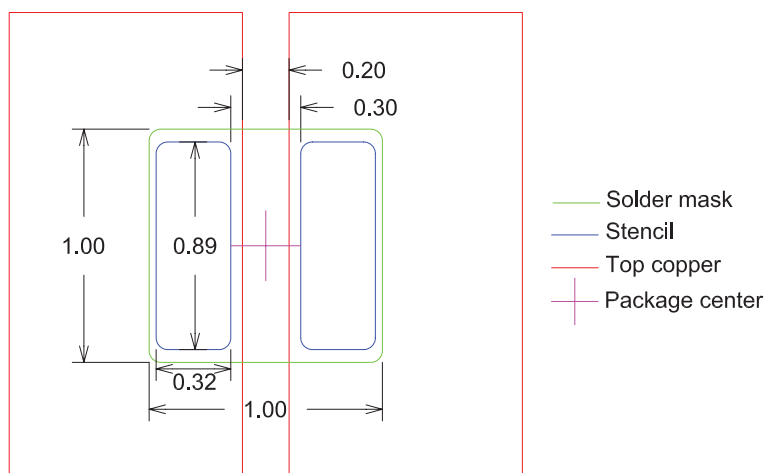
Recommended PCB solder pad layout for LUXEON UV FC1.
